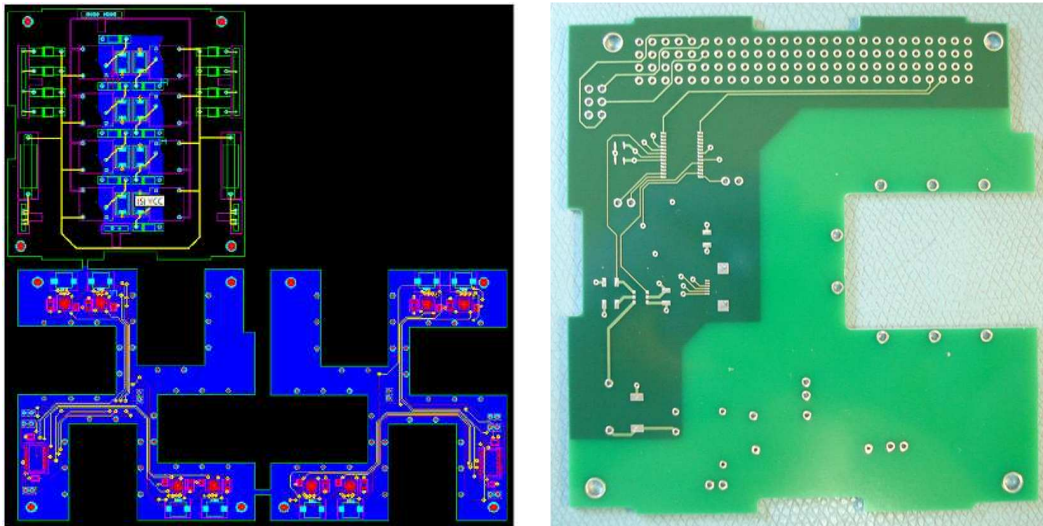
The PCB layout for the STRaND  $\mu$ PPT flight module and the manufactured PCB for the qualification model
